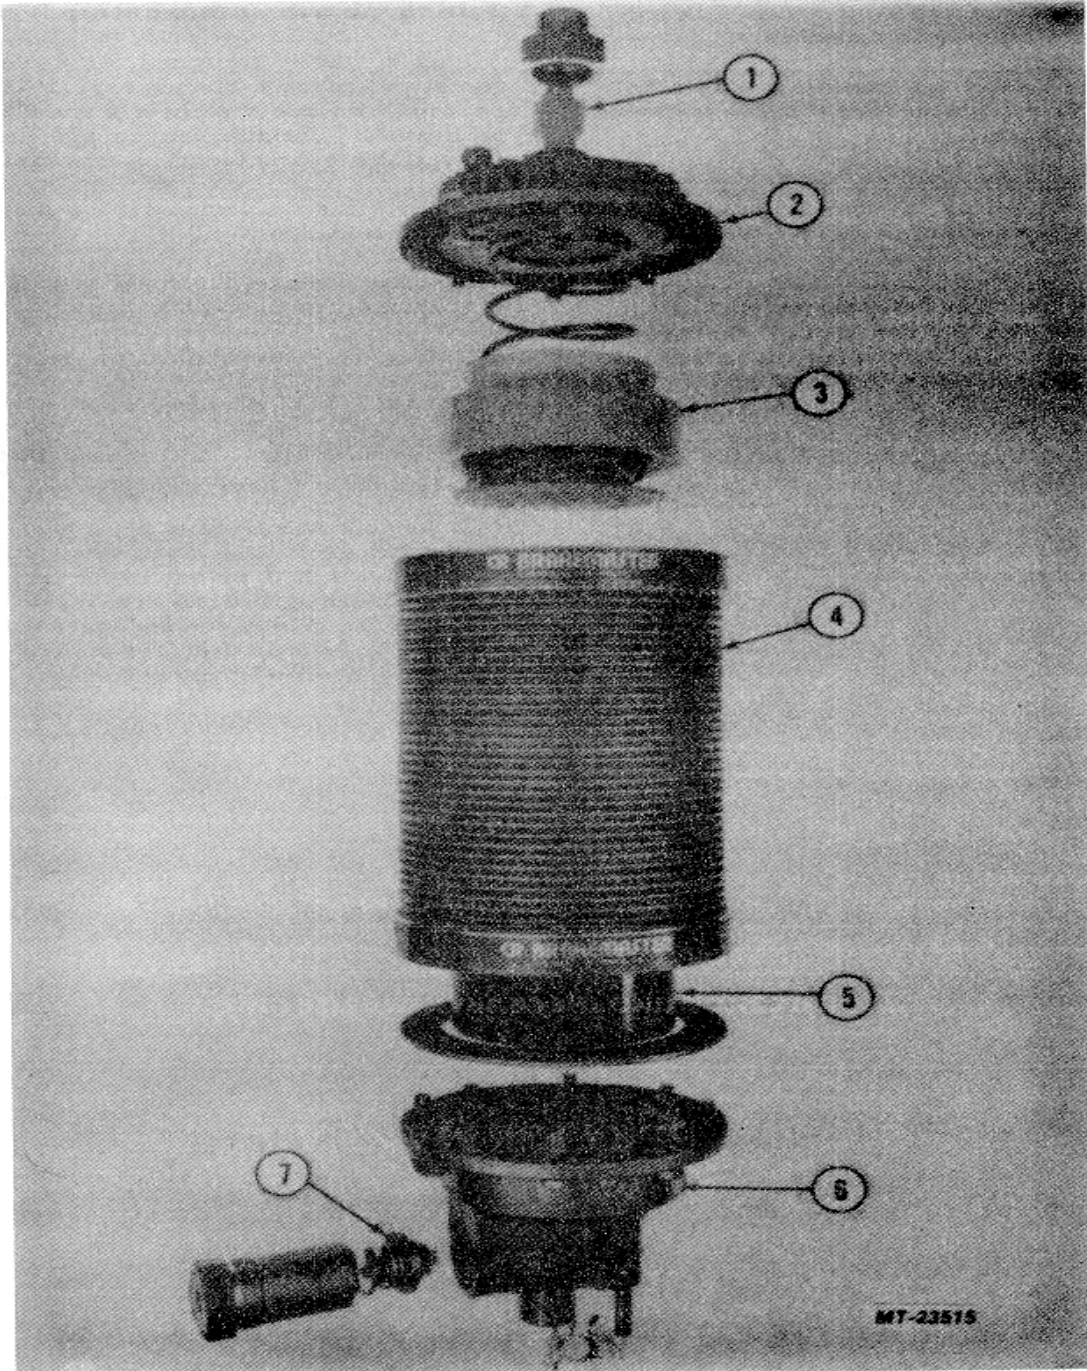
Exploded View of CR Brakemaster Heat Exchanger
